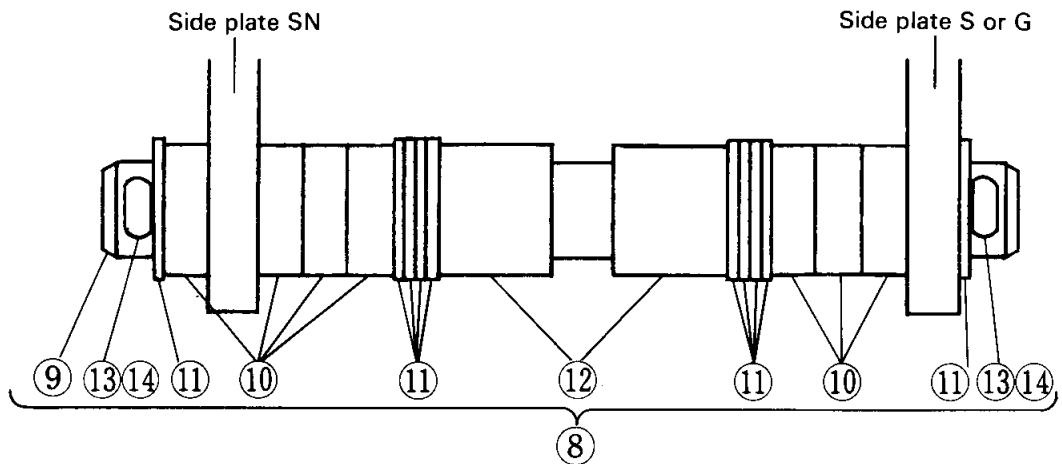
Suspension shaft W30 assembly. (5 t)
